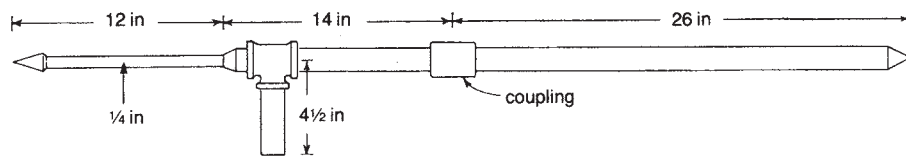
A probe for locating pocket gopher tunnels can be built in a shop. The shaft may be in one piece or divided by pipe coupling for convenient carrying when it is not in use. (Drawing not to scale.)
